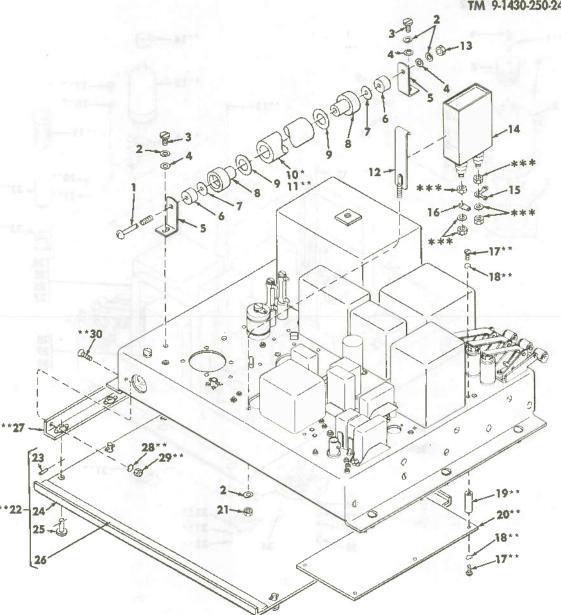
CONTROL, ANTENNA C-1495/M /801225G/-PARTIAL EXPLODED VIEW /SEE FIGURE 4 FOR NEXT HIGHER ASSEMBLY/
